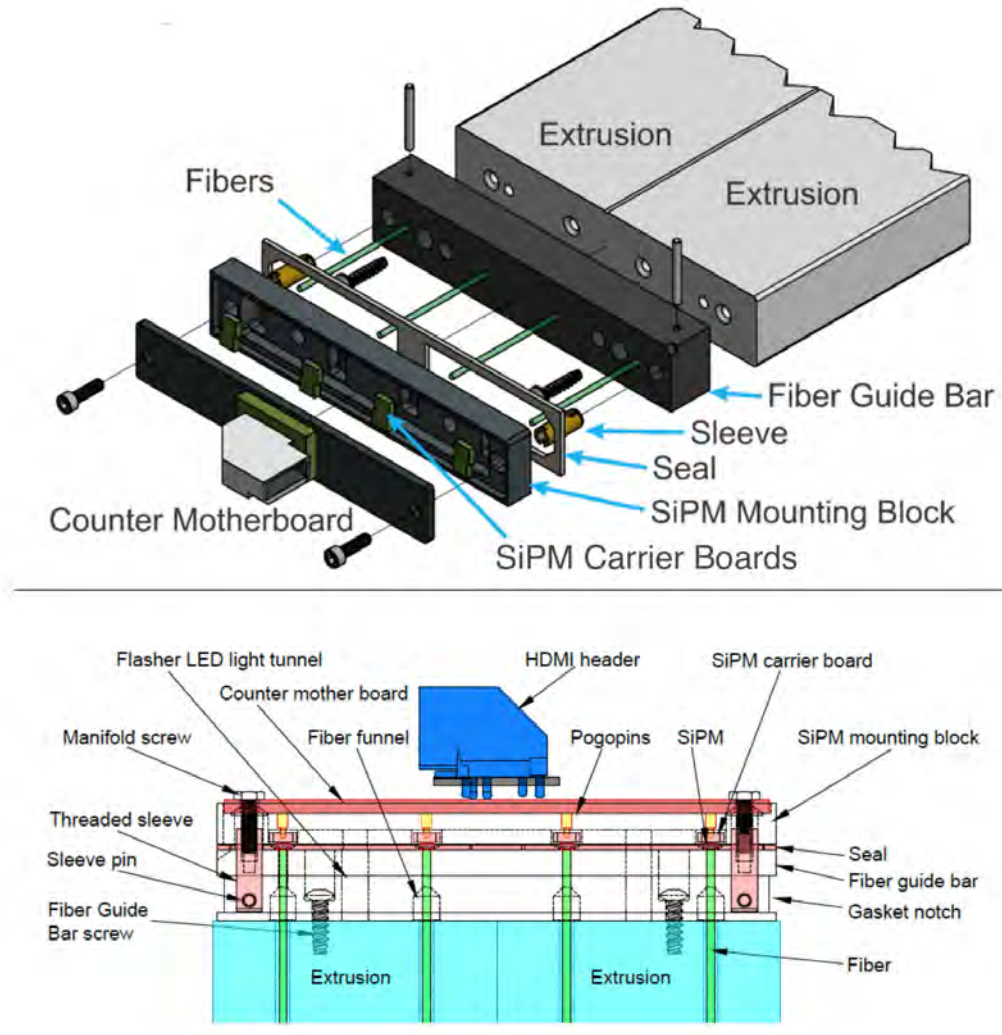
Fiber guide bar and counter motherboard details. Top: Exploded diagram of the mechanical design of a dicounter end and the readout electronics, known as a manifold. Bottom: X-ray view of the manifold assembly. Two types of manifolds are used: those with 90° HDMI headers, as shown in the figures, and those with straight HDMI headers (not shown).
